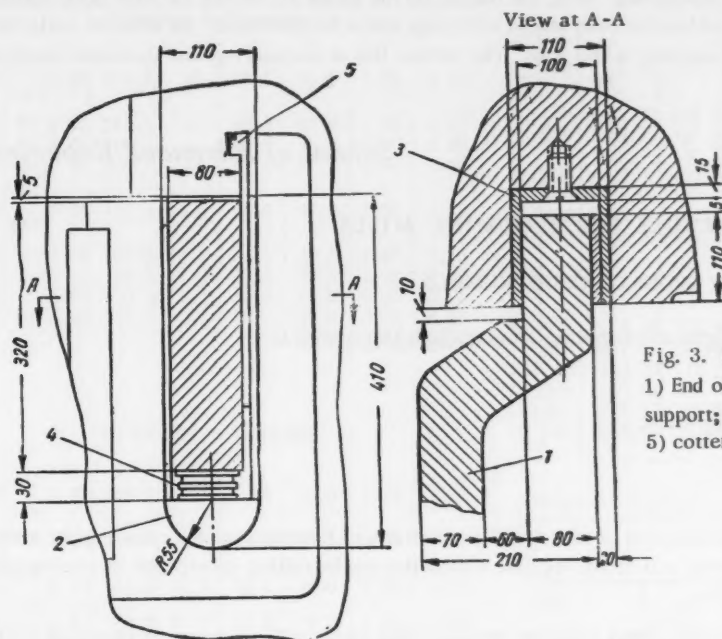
Method of mounting the guide: 1) End of the guide; 2) hemispherical support; 3) II-shaped section; 4) inserts; 5) cotter.
